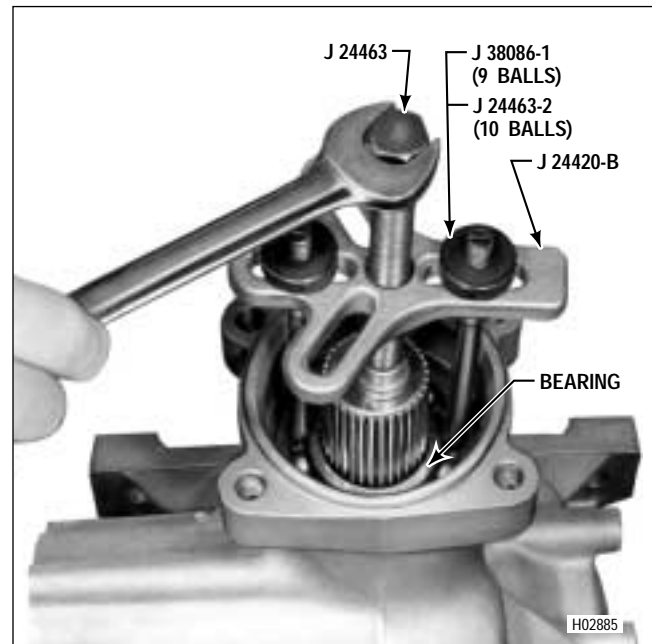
Removing Ten-Ball Bearing from Output Shaft
